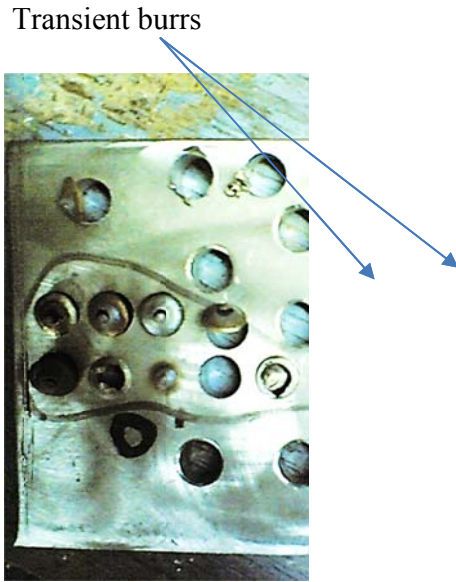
Burr formation mechanism of drilling exit burr [15]
